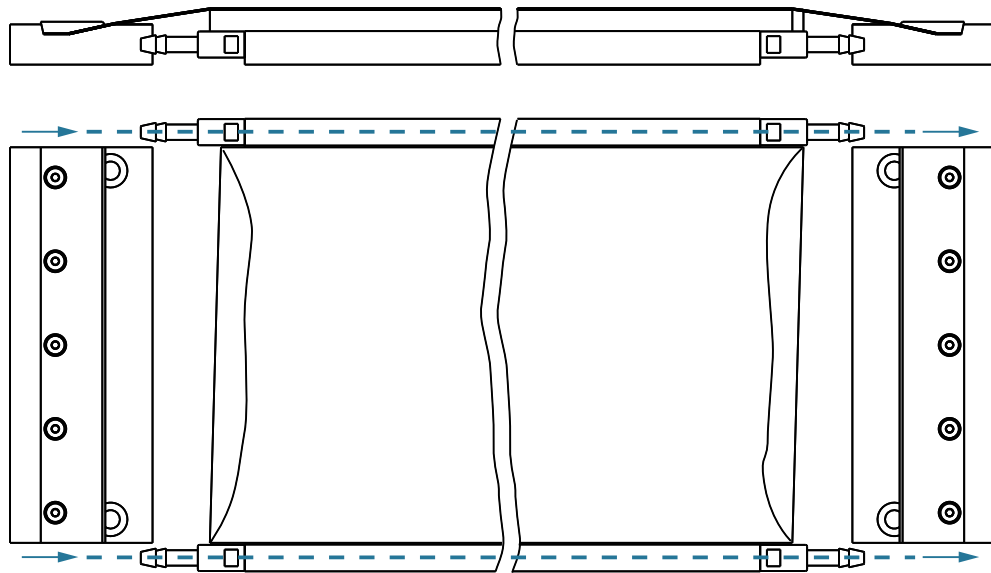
Secondary section cooling consisting of cooling sections with hose nipples and cover end pieces on both sides for all motors of sizes 1FN3050 ... 1FN3450 (side and top view)
